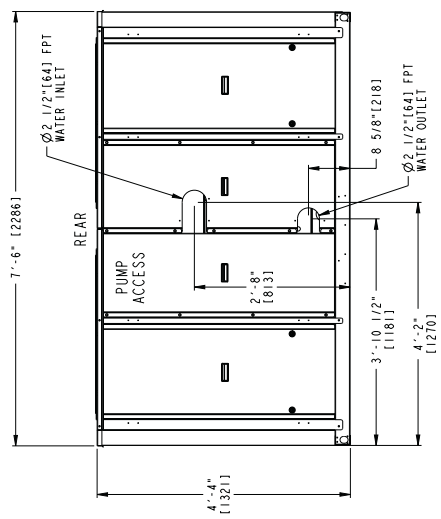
Dimensions — 30RA032-040 AquaSnap™ Chiller
